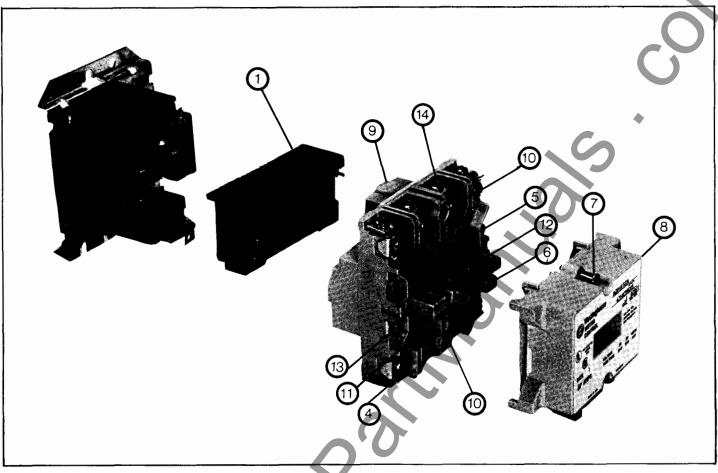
Size 1 A210 or A250 Contactor (Exploded View)
